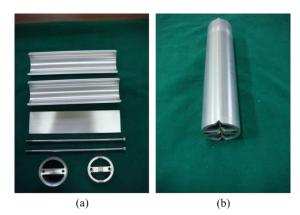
The irradiation device for DU target in IP5 : (a) Disassembled parts and (b) assembled device
